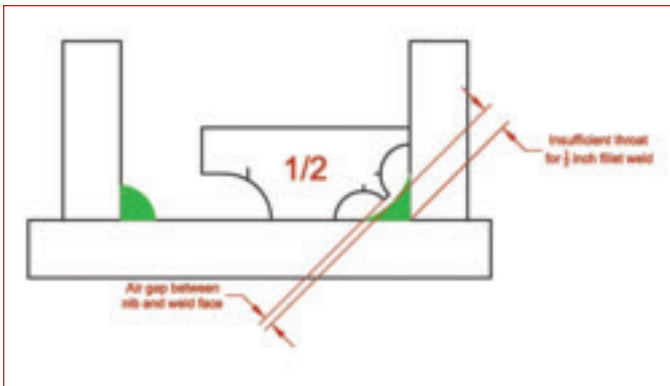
Fillet weld gauge sizing a concave fillet weld that has insufficient throat to meet the size requirements of a fillet weld with 1/2-in. legs.
